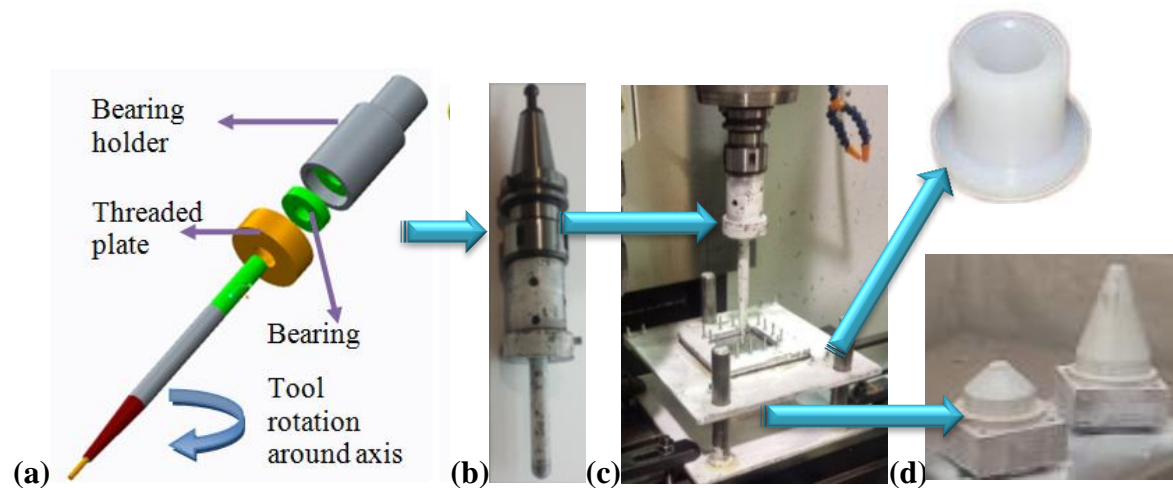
ISF equipment; (a) CAD model of rotating tool (4.5mm Dia), (b) Rotating tool (16.5mm Dia), (c) Equipment mounted on CNC, (d) Nylon bushes and wooden Dies.
